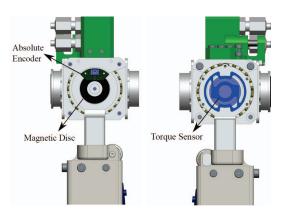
CAD model of HFE. *Left:* mounting of absolute magnetic encoder and magnetic disk. *Right:* the other side of the motor, with custom designed strain gauges-based torque sensor inserted into the HFE motor spline shaft.
